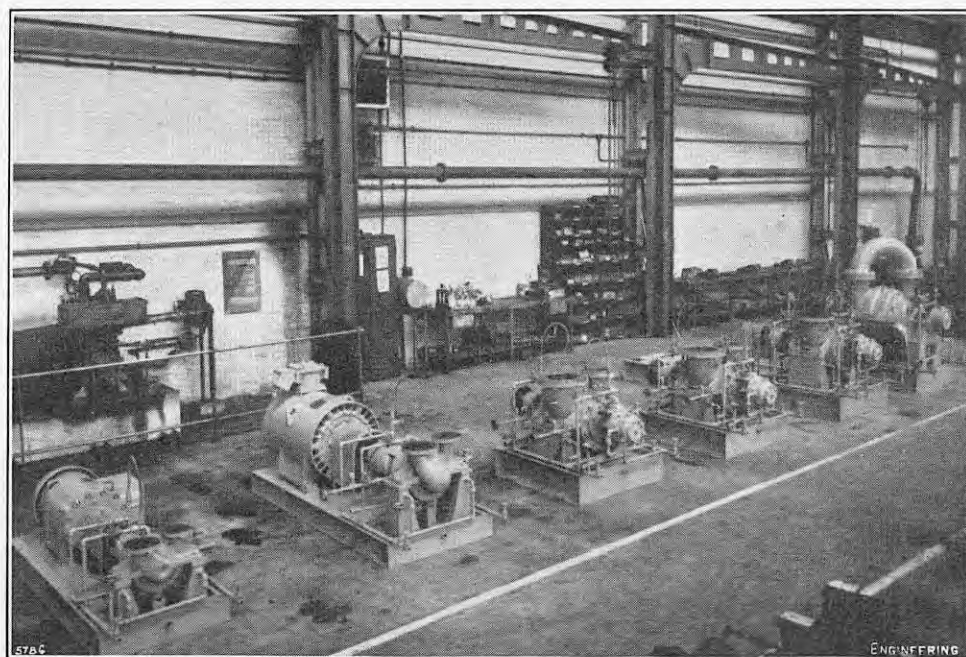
BATCH OF PROCESS PUMPS IN HEAVY-ASSEMBLY BAY.
